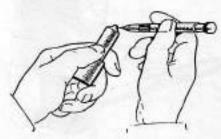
Use a pie vise and proper size cleaning wire to probe all carbon from the four injection spray holes in each nozzle tip.
